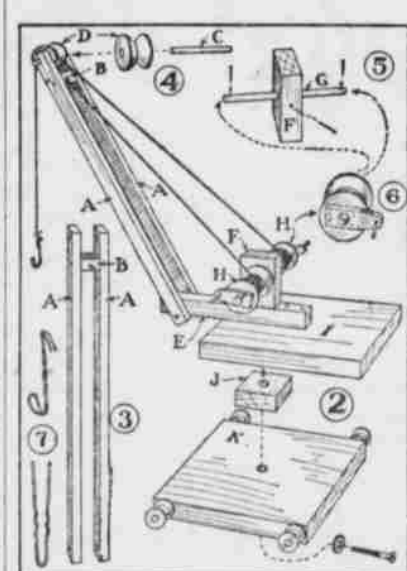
shows details of the crane, windlasses and turntable, and Fig. 8 the cabin walls and roof. The crane boom is made of two strips (A, Fig. 3) 14 inches long, with a short block (B) fastened between, one and one-half inches from one end. Bore a one-fourth-inch hole through each strip near the upper end for the axle C (Fig. 4) to fit in, and a one-eighth-inch hole near the lower end through which to pivot the boom. Make the pulley of two spool ends nailed together (Fig. 4).
